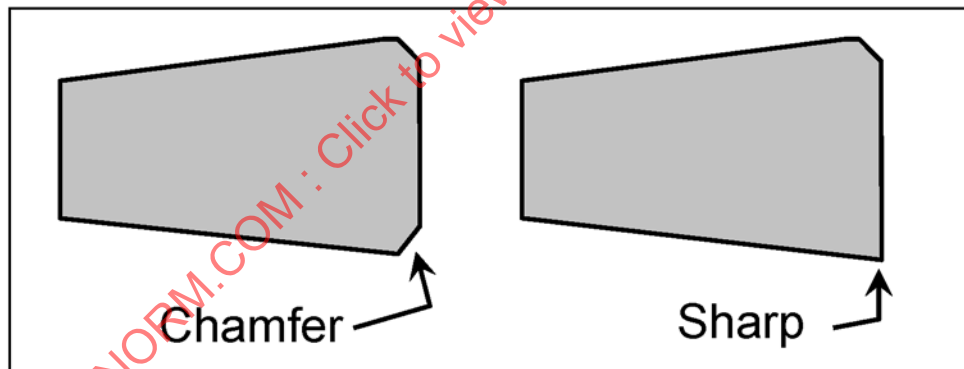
SCHEMATICS OF BOTTOM SIDE OD CHAMFERS
